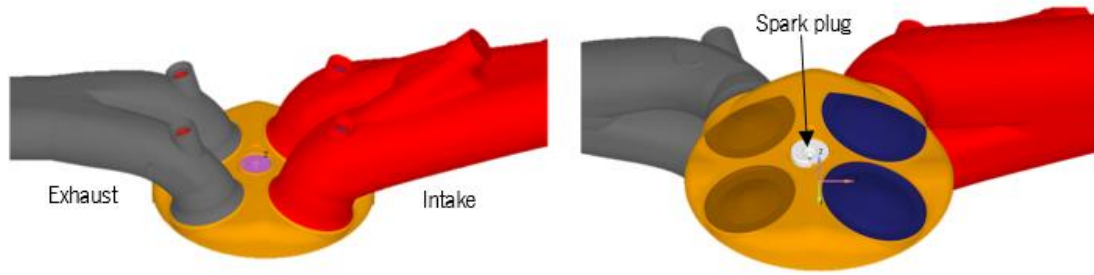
Engine combustion chamber and inlet (red) and exhaust (grey) ports.
